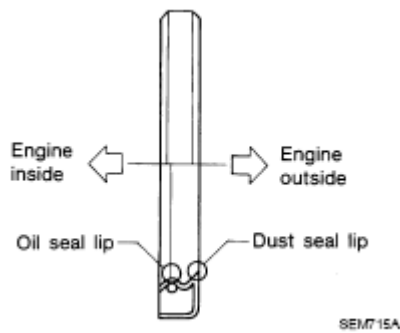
Identifying Oil Seal Lip And Dust Seal Lip
